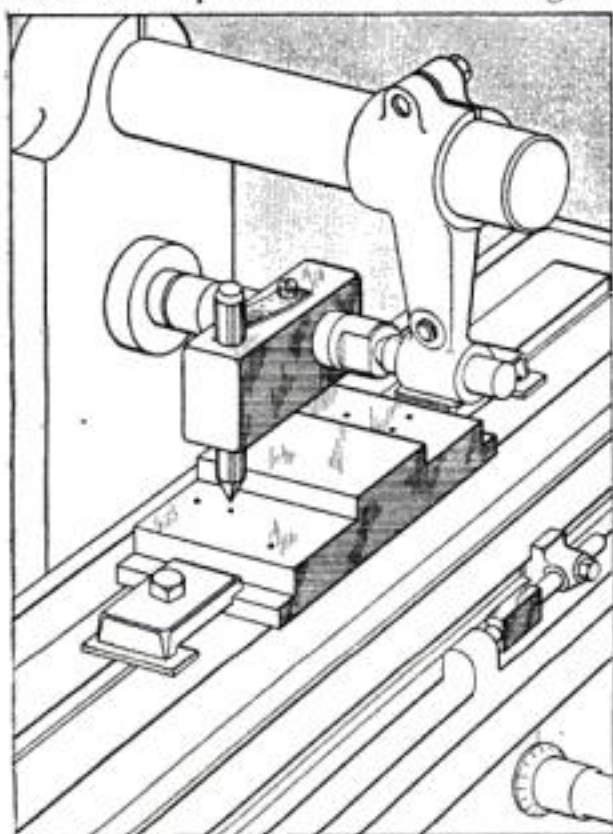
Spotting attachment on milling machine for laying out work quickly and with reasonable accuracy.
